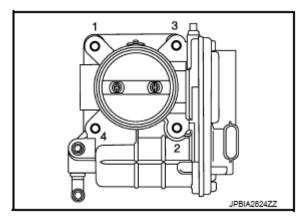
Identifying Tightening Sequence Of Electric Throttle Control Actuator Mounting Bolts
